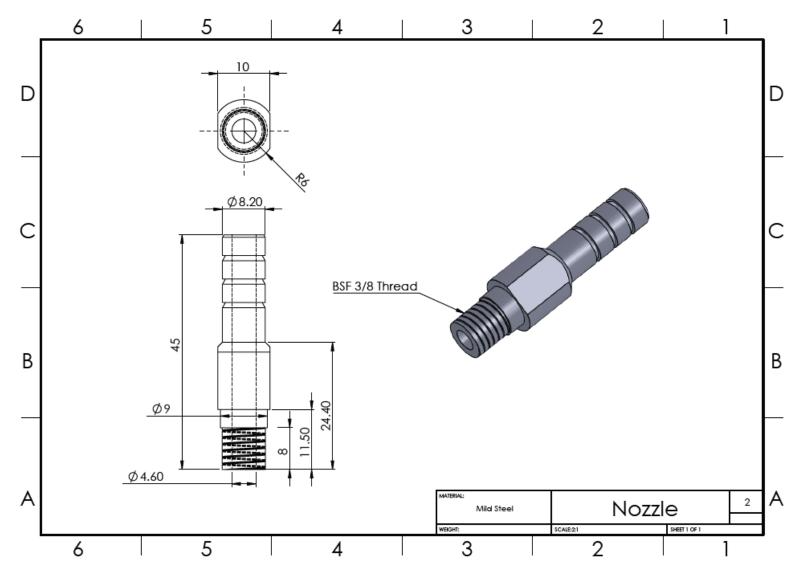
Mechanical drawing of the nozzle component with dimensions (mm)
